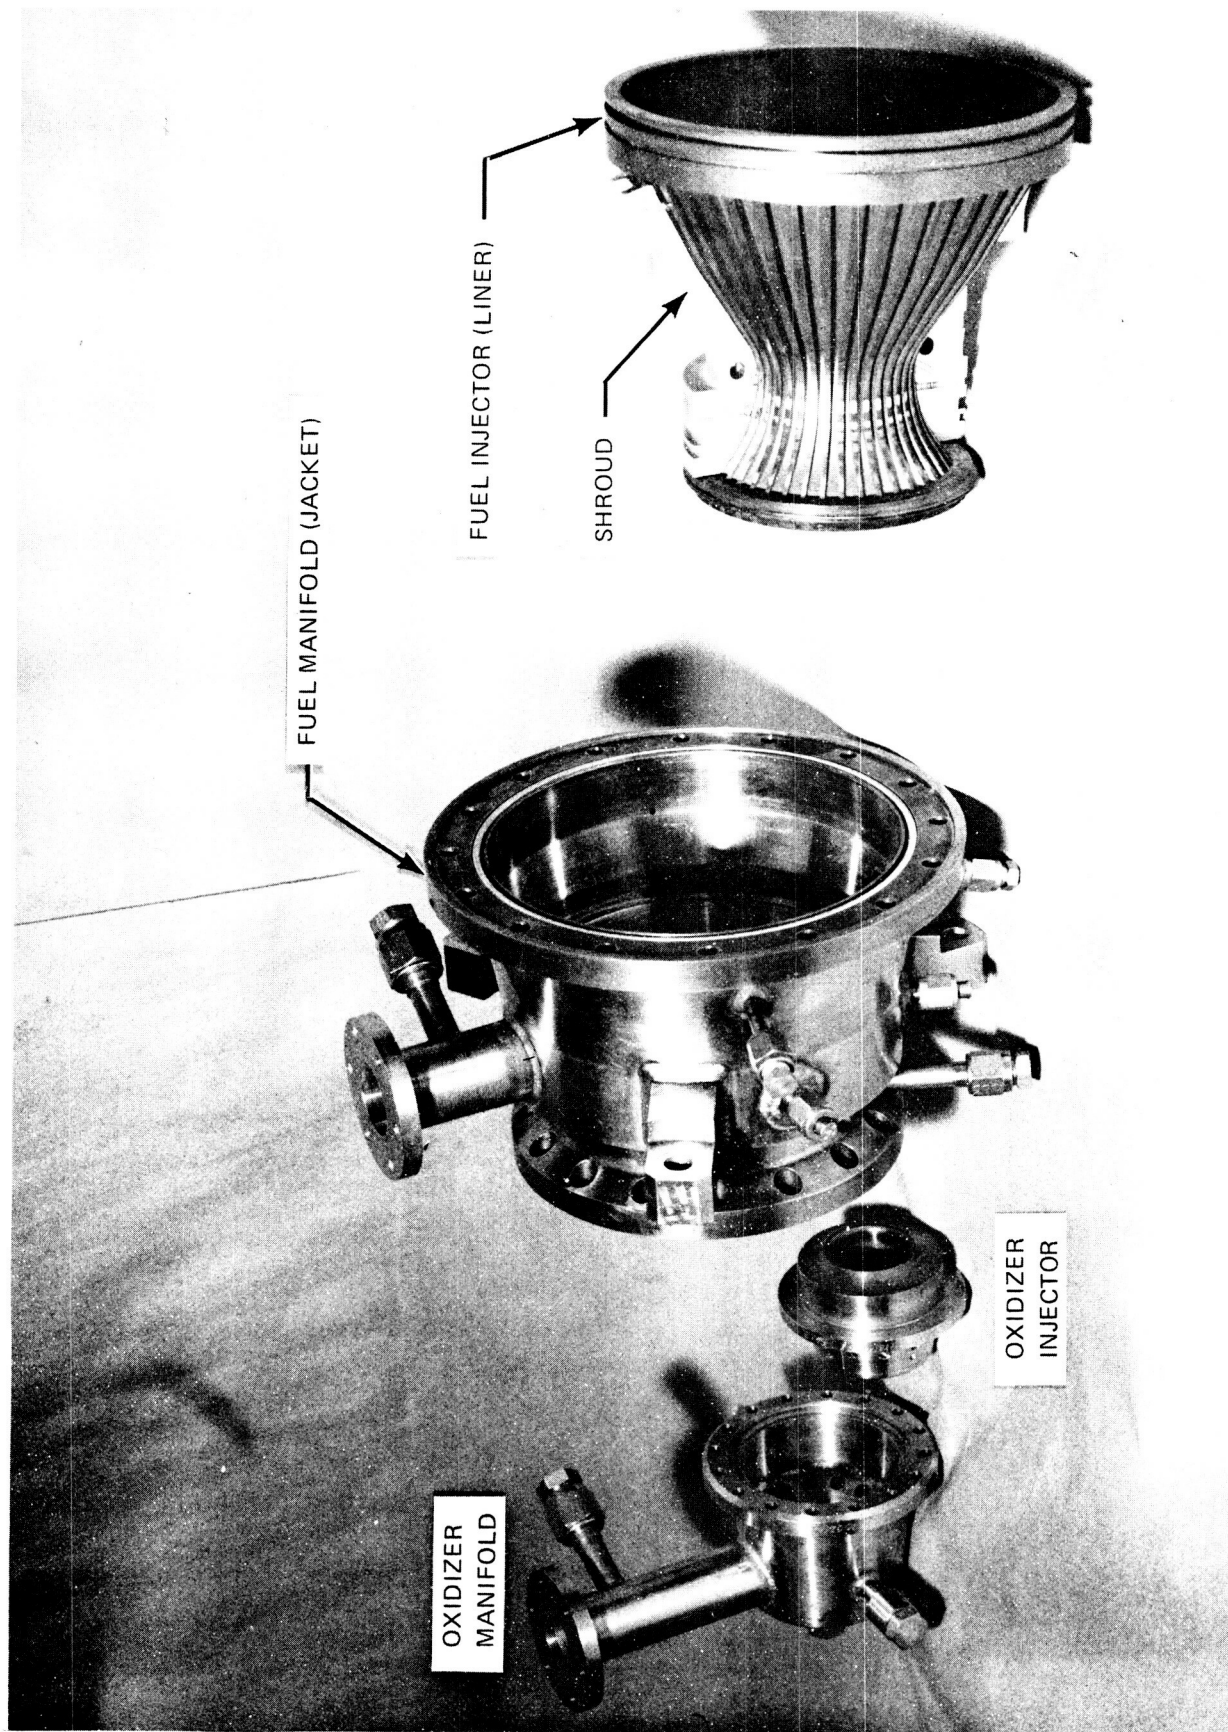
Regeneratively Cooled Fuel Injector, Oxidizer Injector and Manifold Assemblies
